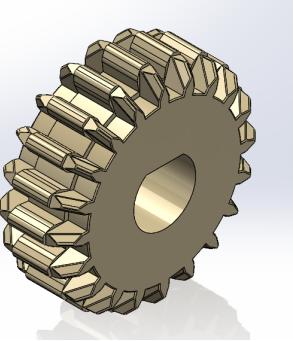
JSumo Tan Technic Gear 20 Tooth Double Bevel
